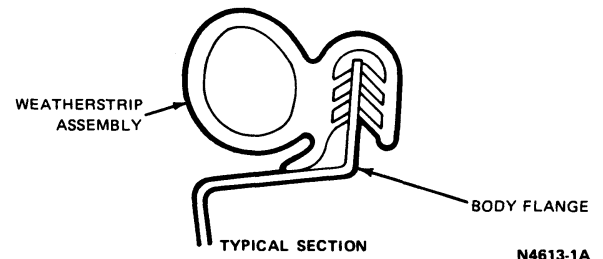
Sliding Door Weatherstrip—E-100—E-350
